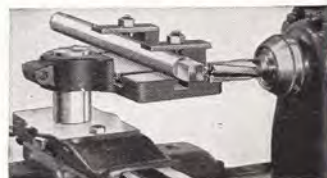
Milling and Boring Table used to Square End of Shaft.
